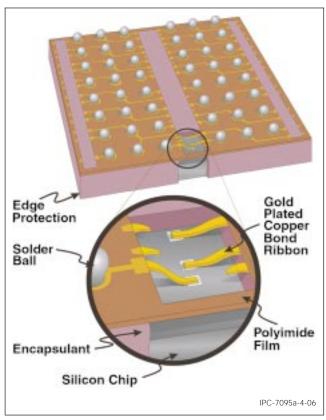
Polyimide Film Based Lead-Bond μBGA Package Substrate Furnishes Close Coupling Between Die Pad and Ball Contact
